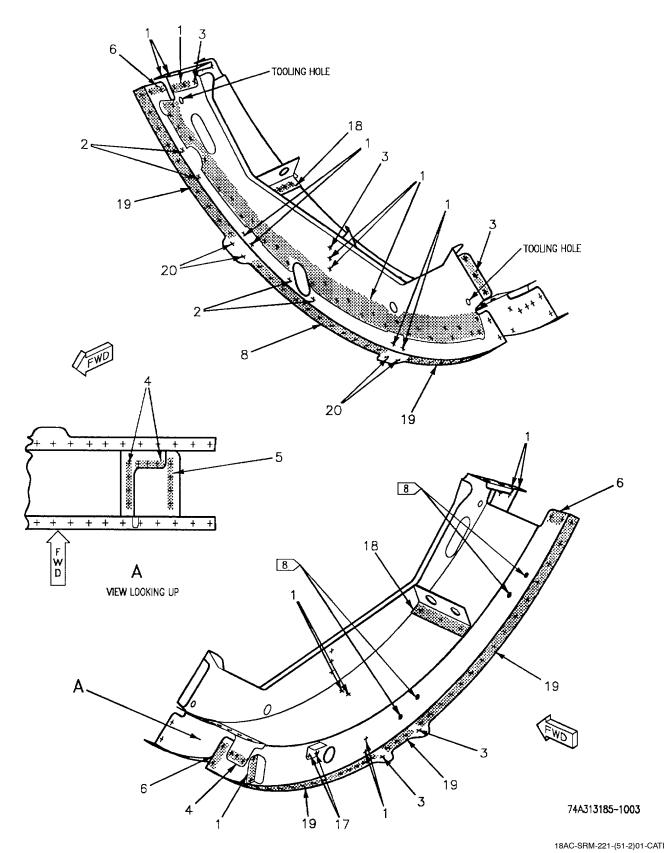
Former, 74A313185, Fastener Index (Sheet 2)
